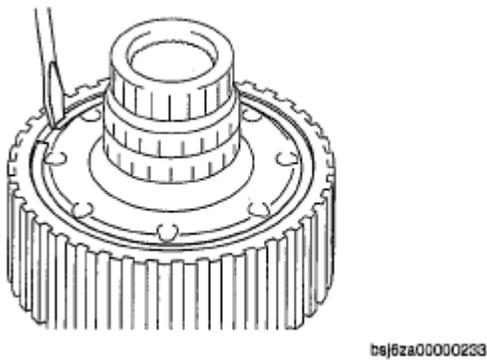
Installing Snap Ring To Rear Planetary Ring Gear
